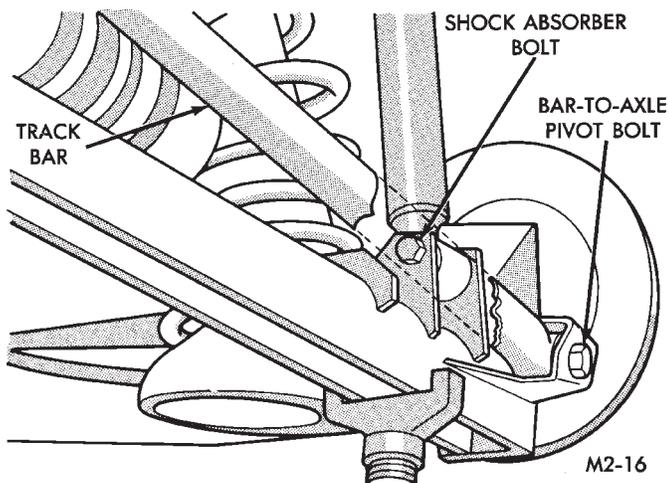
Remove Shock Absorber and Track Bar Bolts
